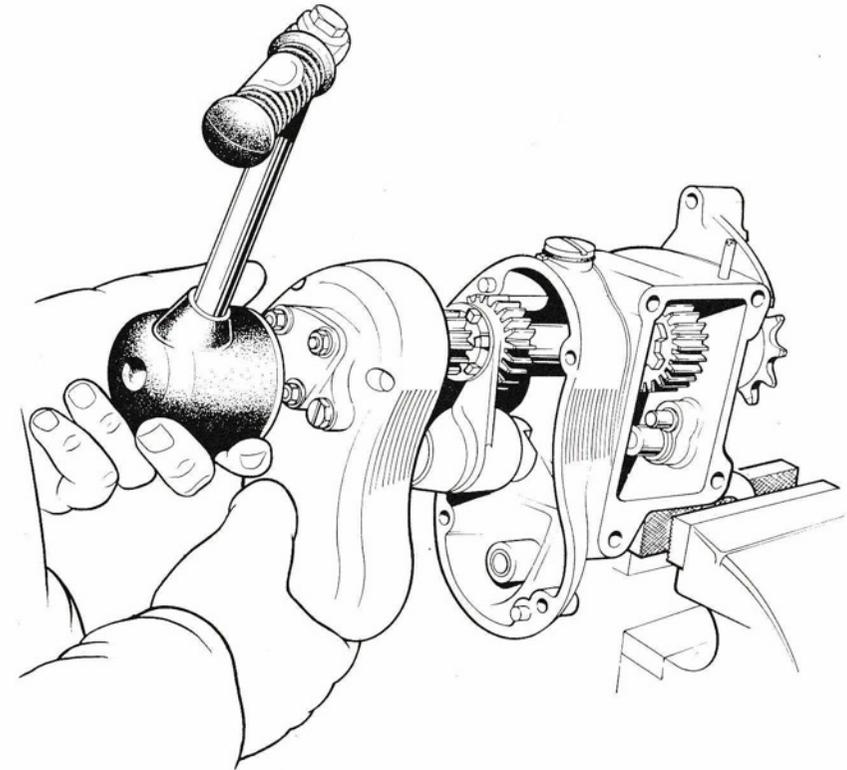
Gearbox (Transmission) showing Method 1 dismantling procedure.
